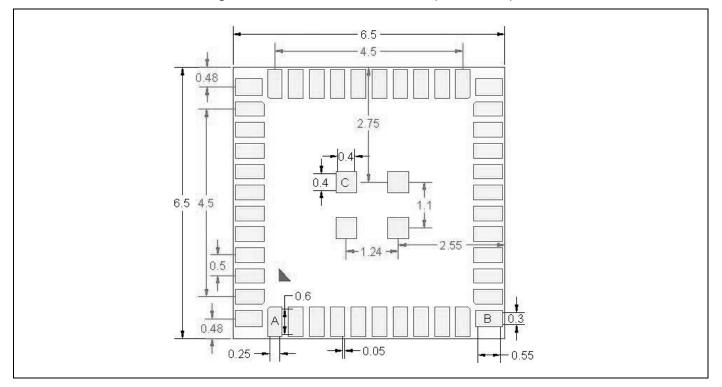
CYW20737S Pin Dimensions (Bottom View)
